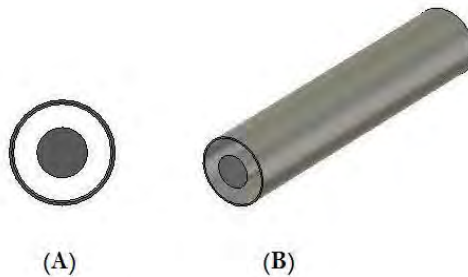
(A) Front view of the sensor (B) Isometric view of the sensor
